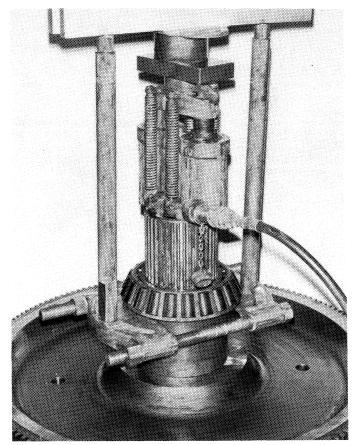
Removing Rear Bearing Inner Race from Output Shaft.
